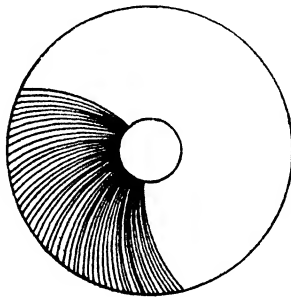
By means of a sharp silicon-carbide stick fine ridges are caused in the surface of the cast-iron wheel called "scoring" or "striping"; recently this operation has been carried out by machinery
